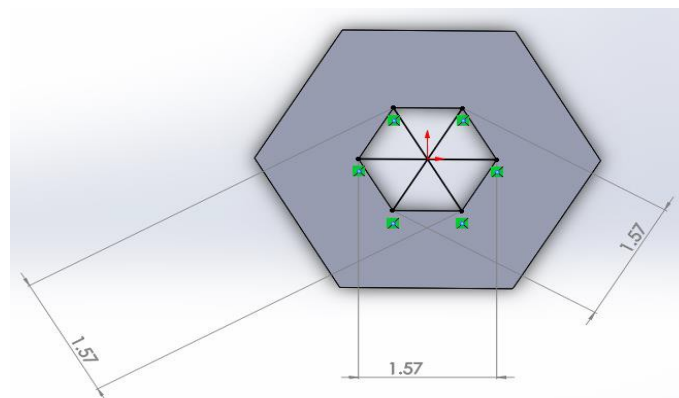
Dimension of pore length in SolidWorks drawing (1.57mm)
